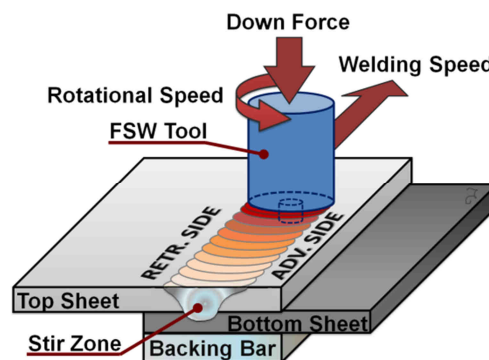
Principle of the friction stir welding process for overlap joint configuration
